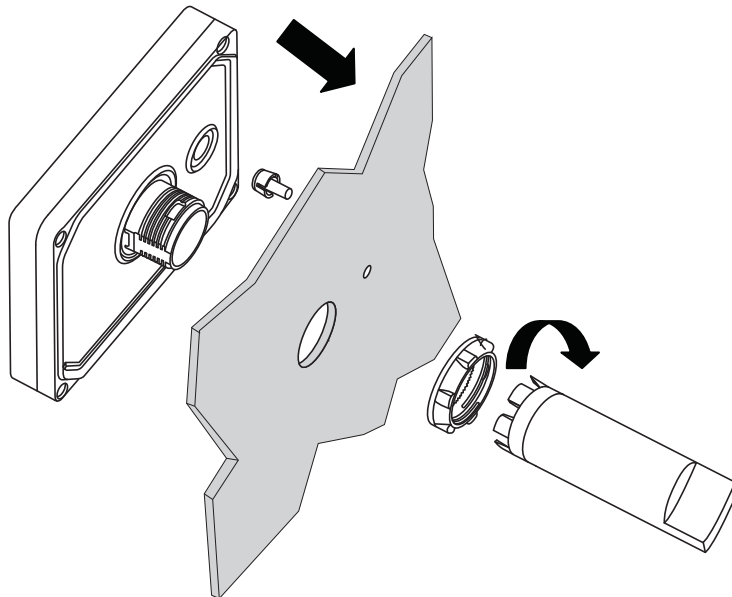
Attaching the Nut Using the Socket Wrench
